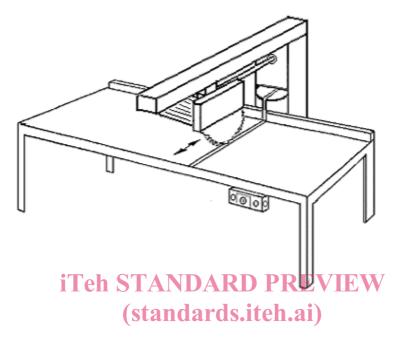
Example of a horizontal cutting cross-cut sawing machine with one saw unit
